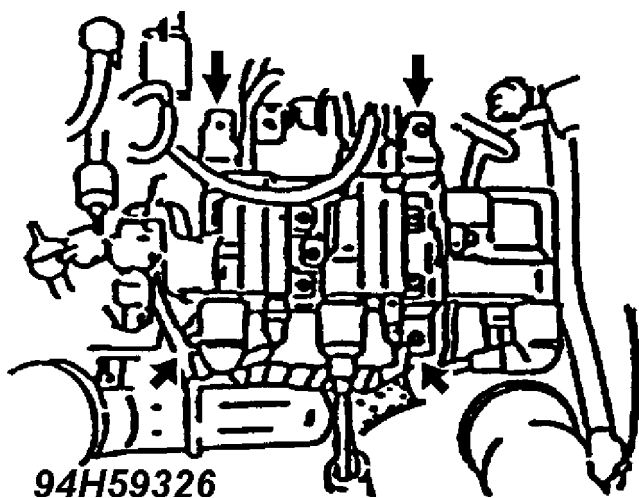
Four Nuts Holding the Ignition Coil Assembly
